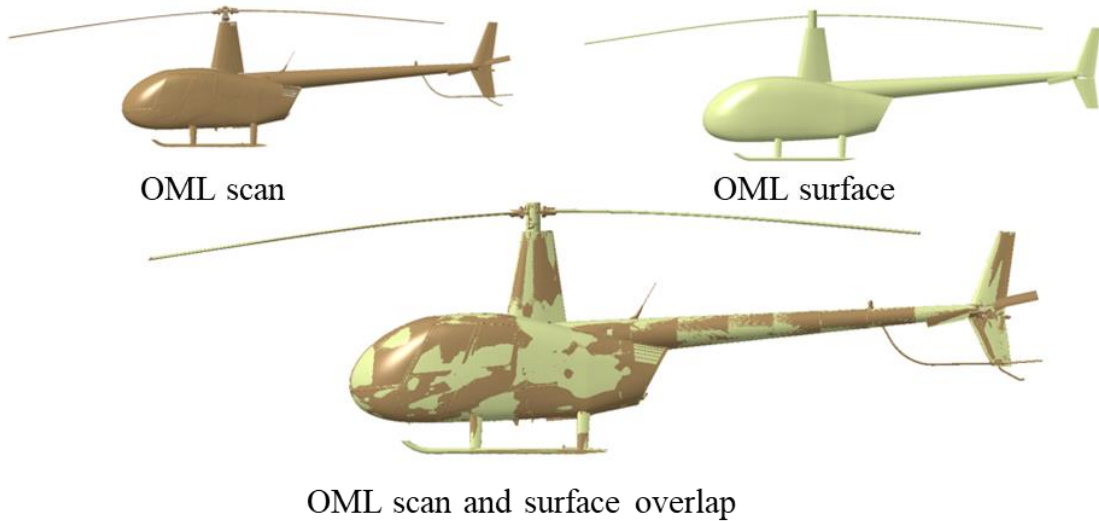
Part 27 Rotorcraft OML scan overlapping OML surface.
